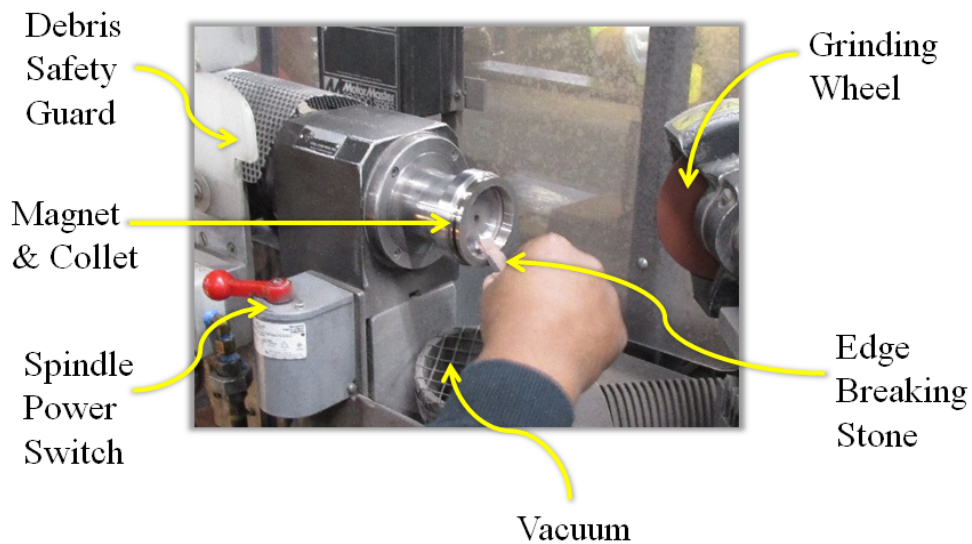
Diagram of the Edge Breaking and Chamfering Machine (Image courtesy of MAGSEAL [5])
